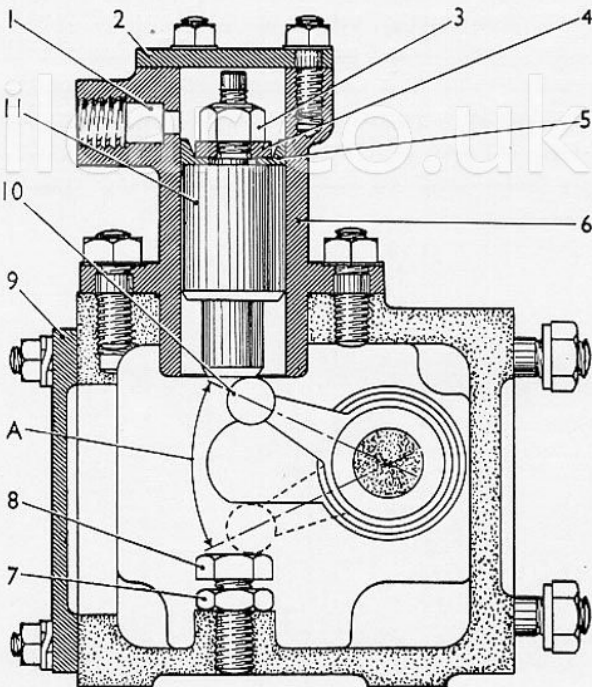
SECTION THROUGH THROTTLE CONTROL MOTOR SHOWING TRAVEL OF ACTUATING LEVER AT FULL THROTTLE
